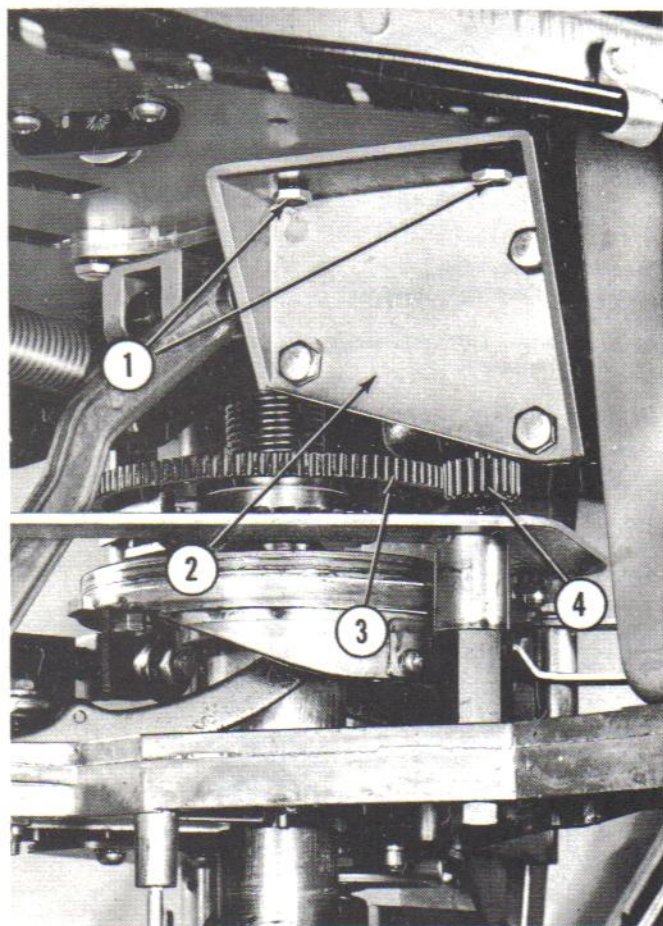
CHANGER MOTOR PINION GEAR ADJUSTMENT
